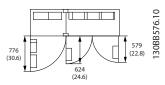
Space in front of IP21/IP54 enclosure type, frame size F12
